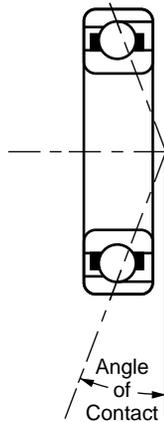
Single Sealed Conrad Bearings, Type SZ.
